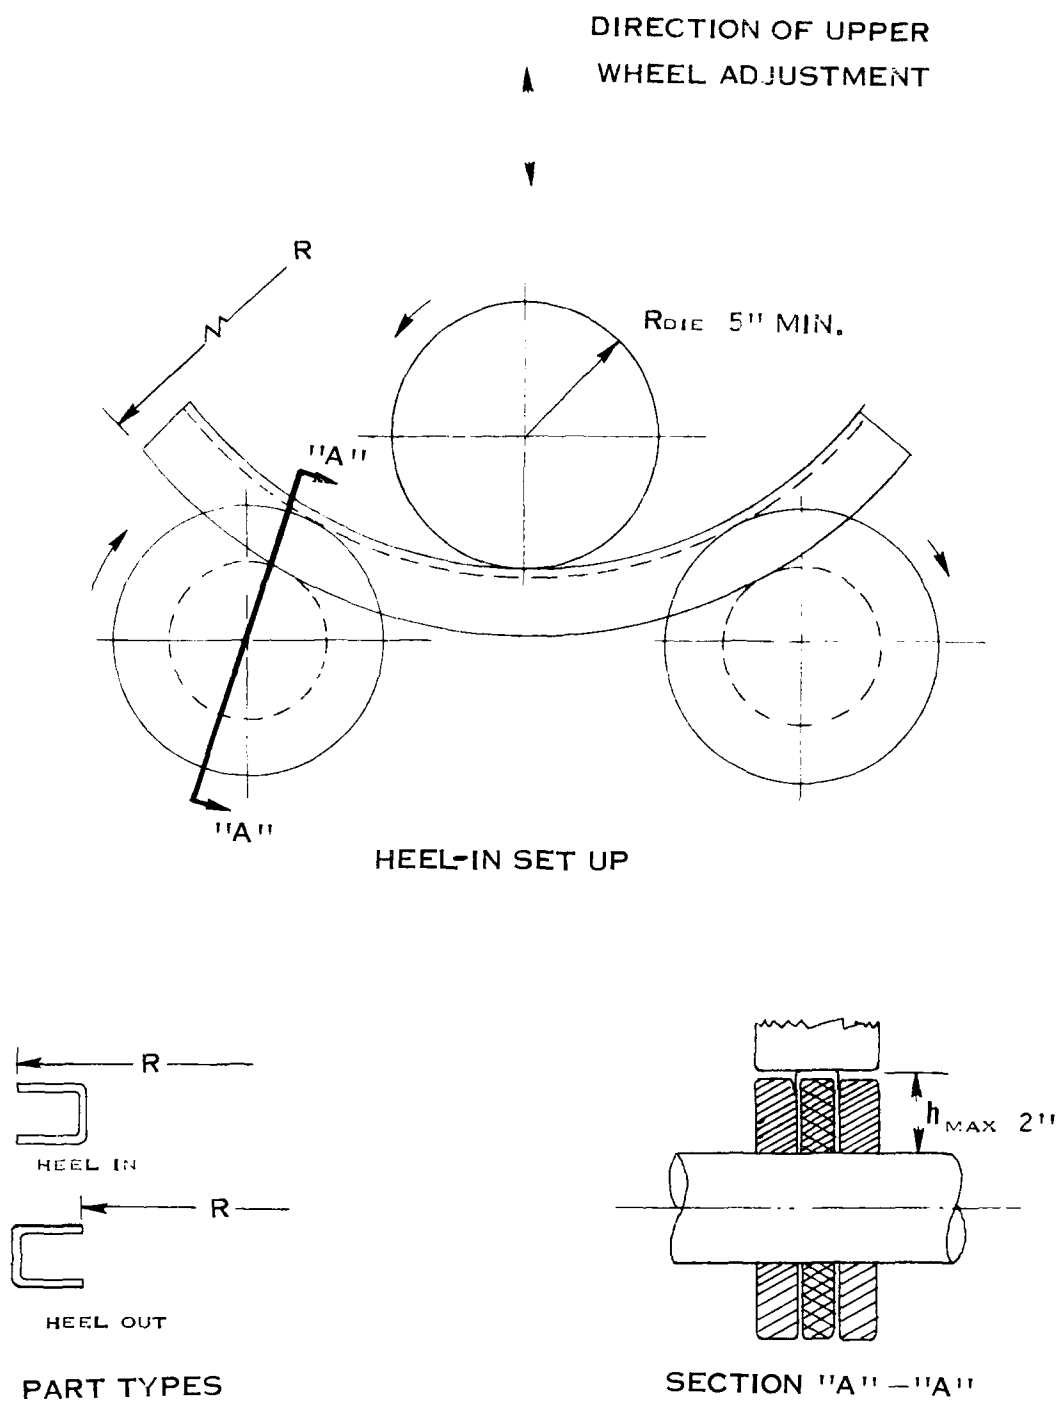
PART TYPES AND SET-UP FOR ROLL FORMING
